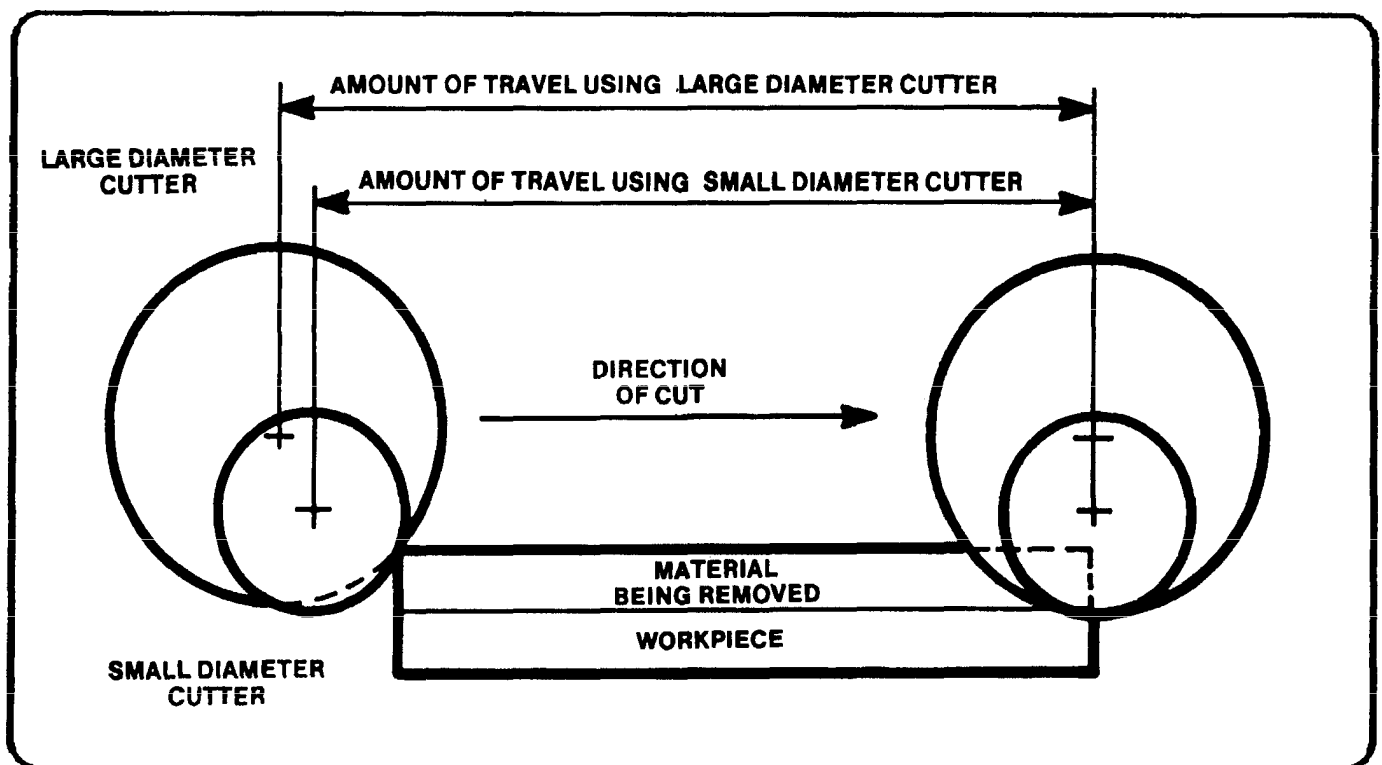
Effect of milling cutter diameter on workpiece travel.
